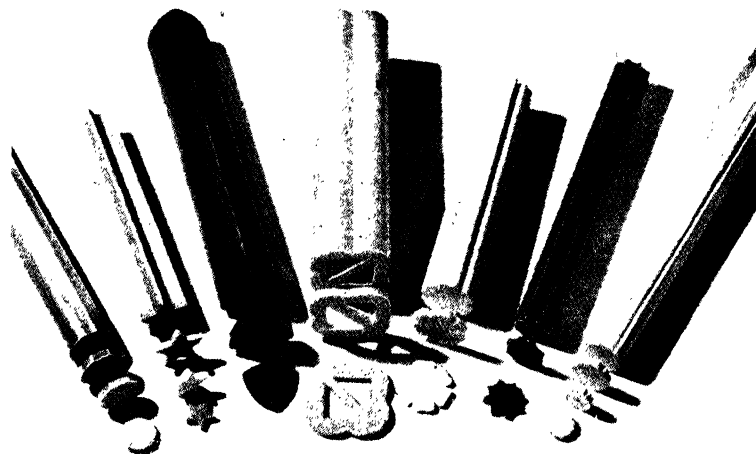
Cast resin rods for buttons and tubes for buckles with blanks sliced off for making finished buttons and buckles<sup>9</sup>
